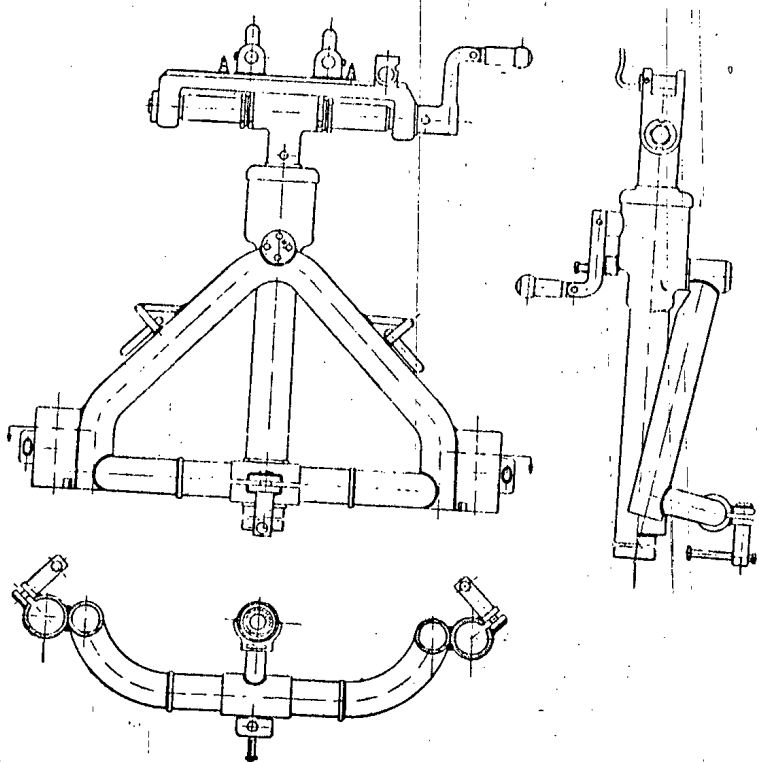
Bipod assembly -- rough leveling mechanism, turned for 180°
